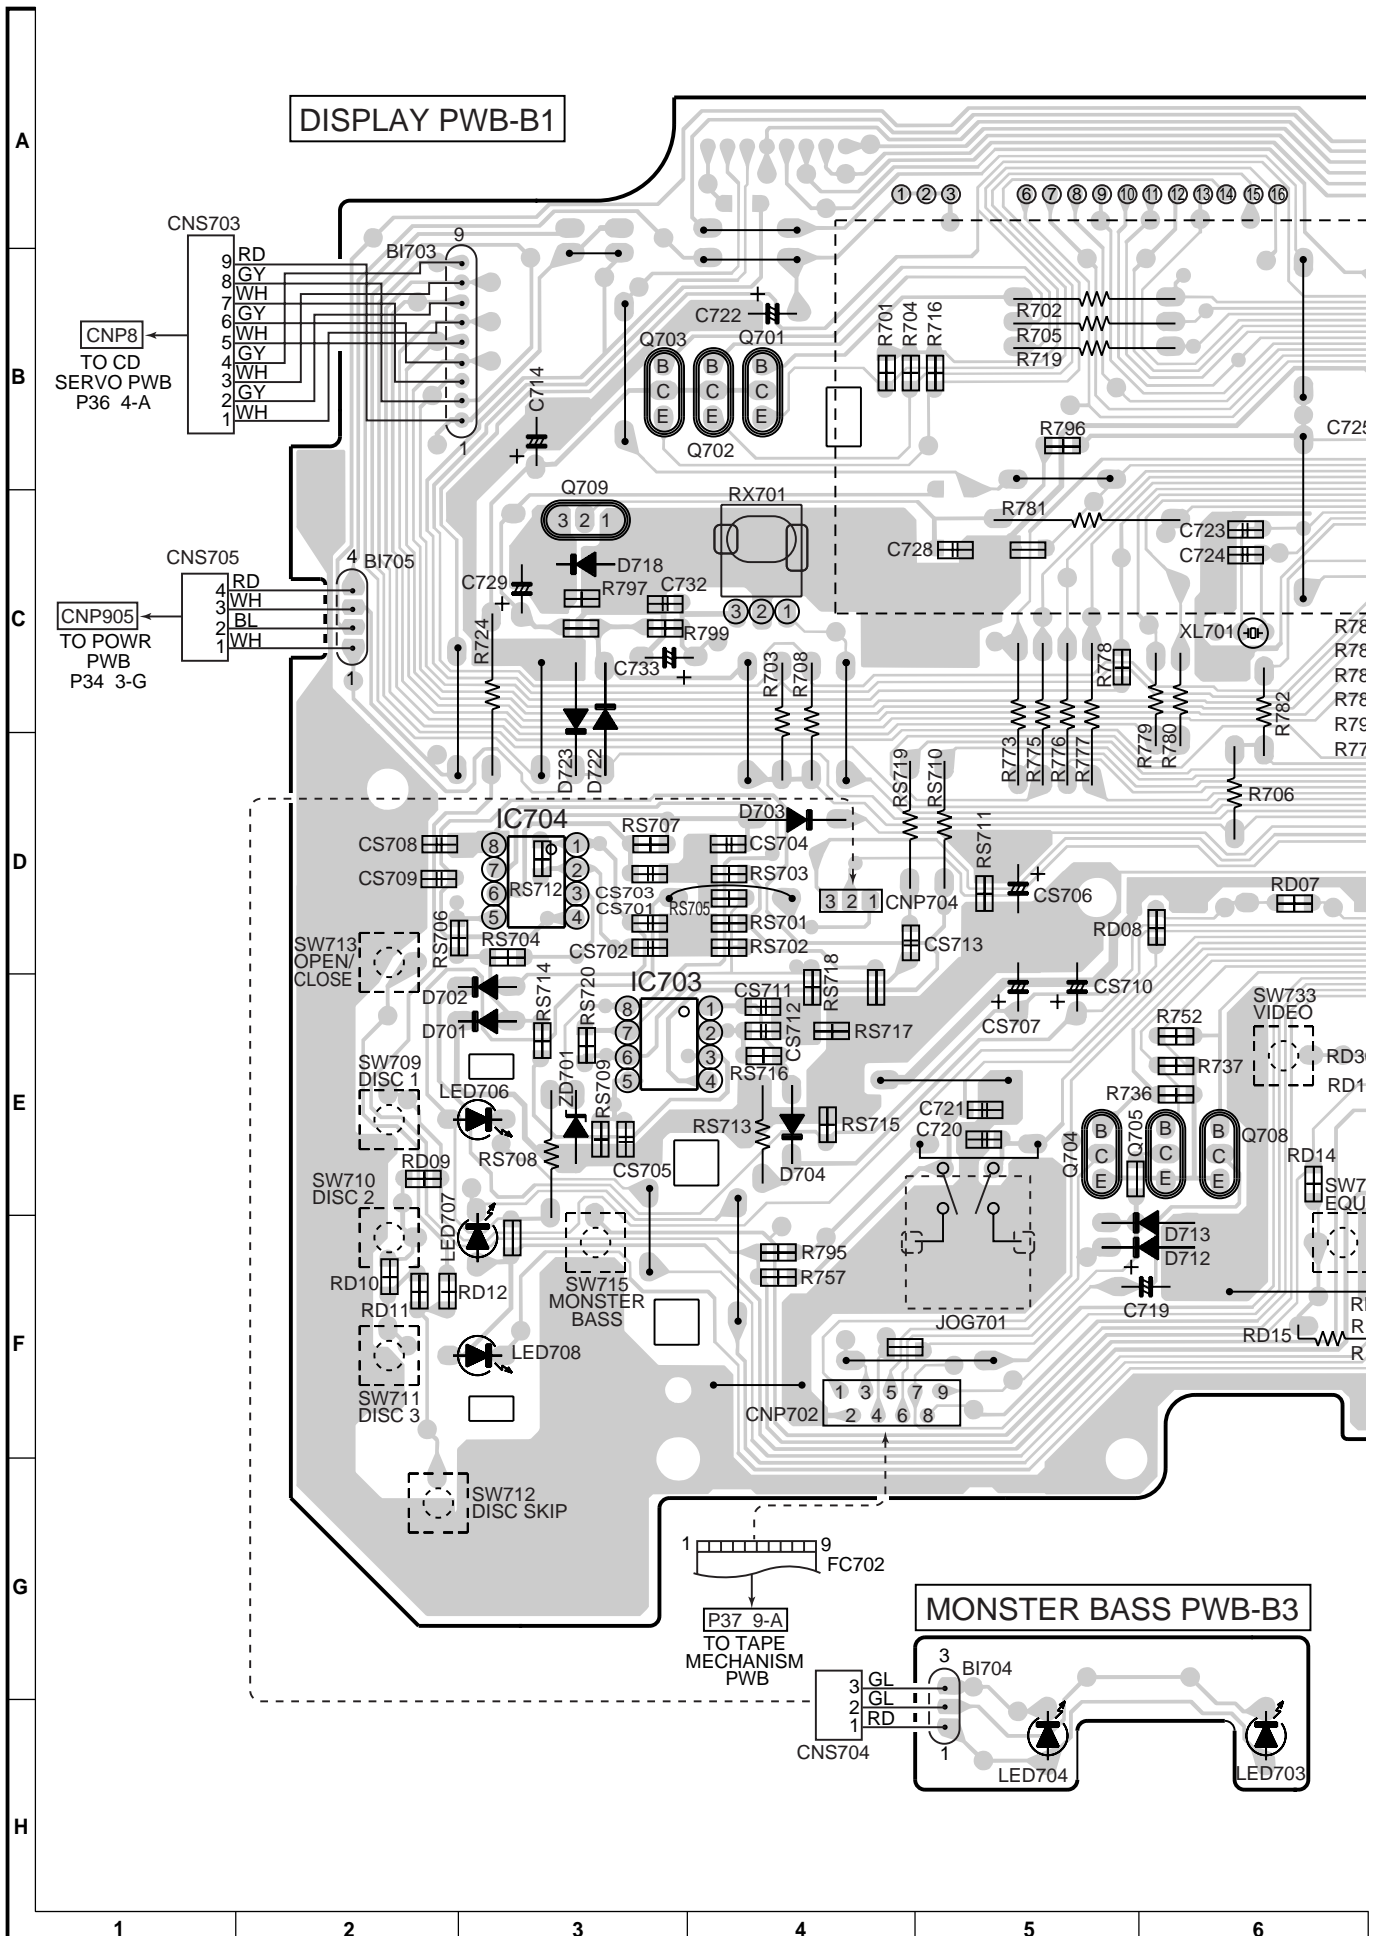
WIRING SIDE OF P.W.BOARD (4/9)
